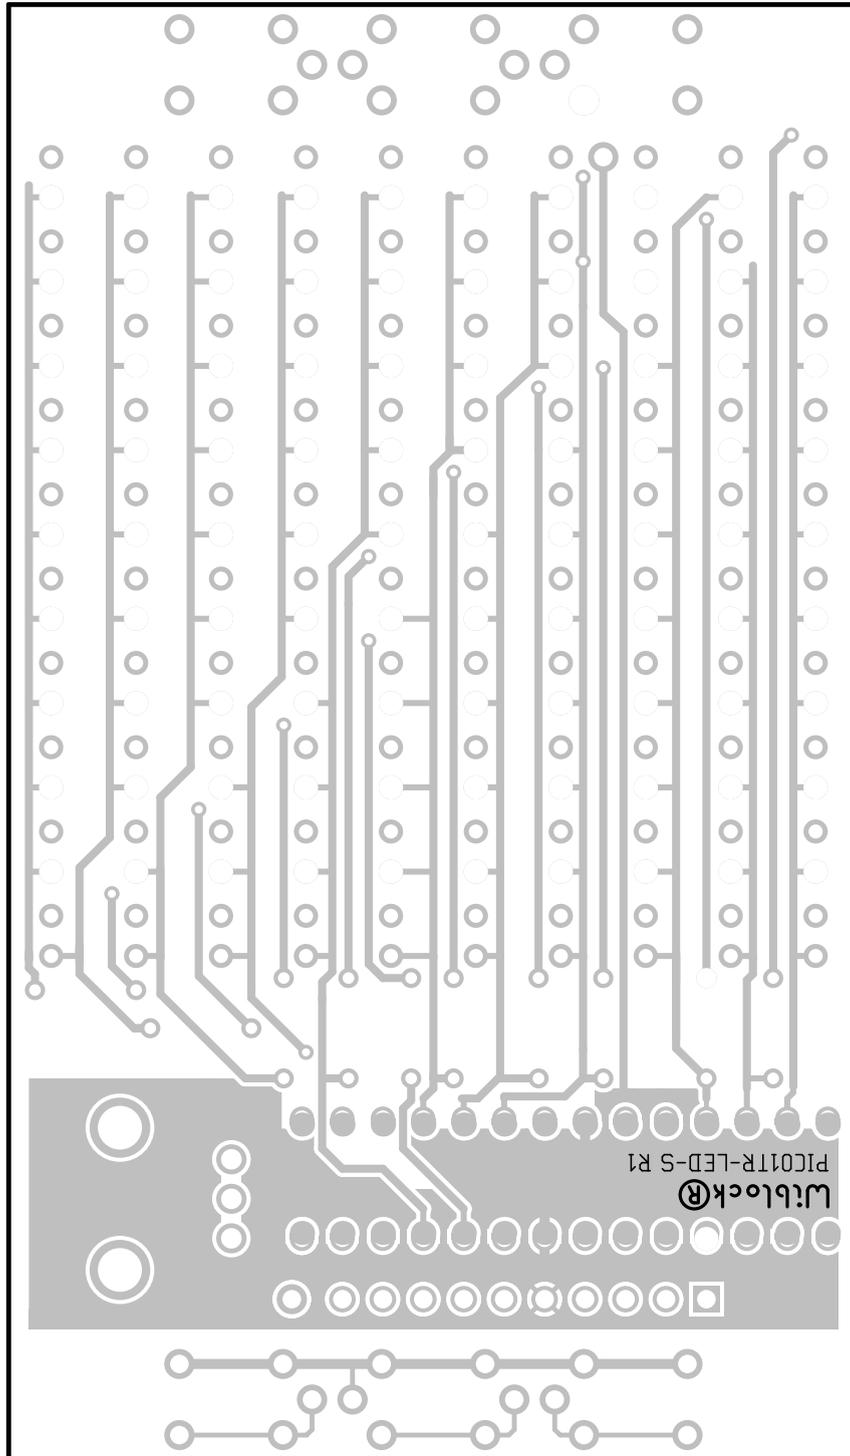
PICO1TR-LED-S Bottom Side Assembly Drawing (Rev 1)
